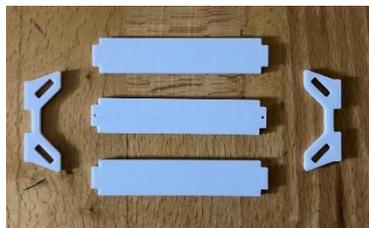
Overview of 3D printed components assembled to one packaging.
